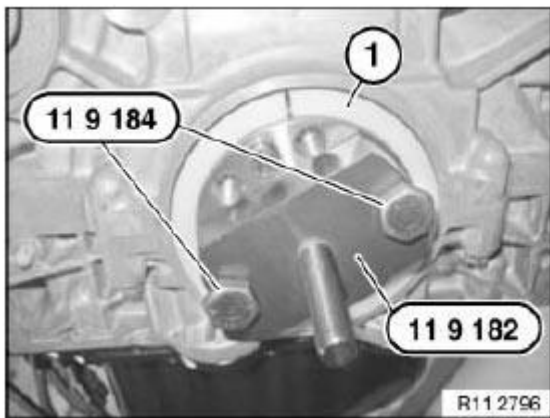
Special Tools (11 9 184) And (11 9 182)
